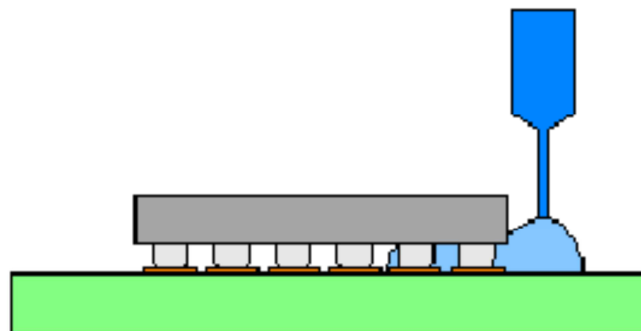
Dispensing the underfill encapsulant for flip chip assembly [13].
